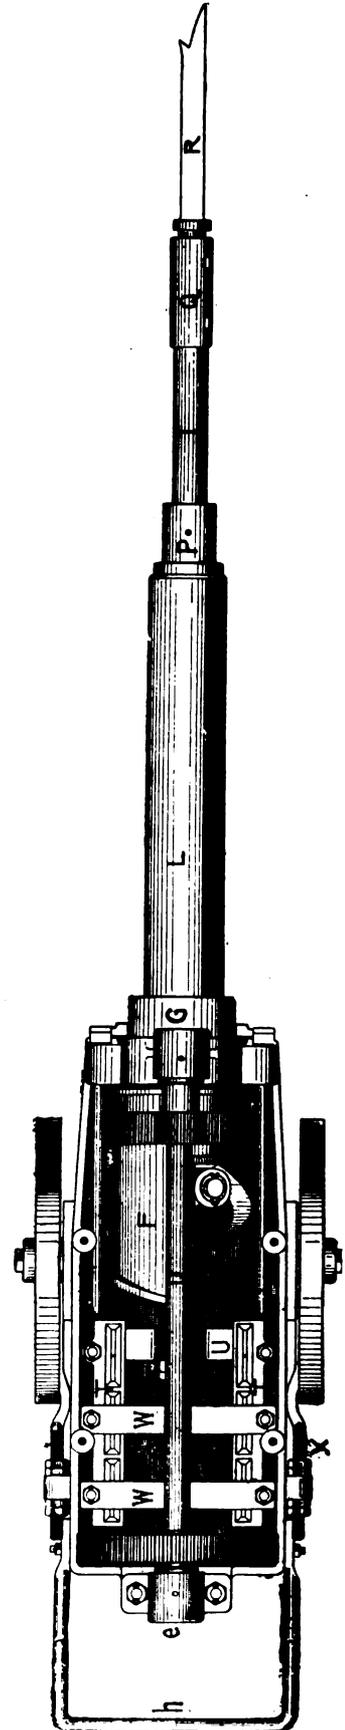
TOP VIEW WITH MOTOR REMOVED.
